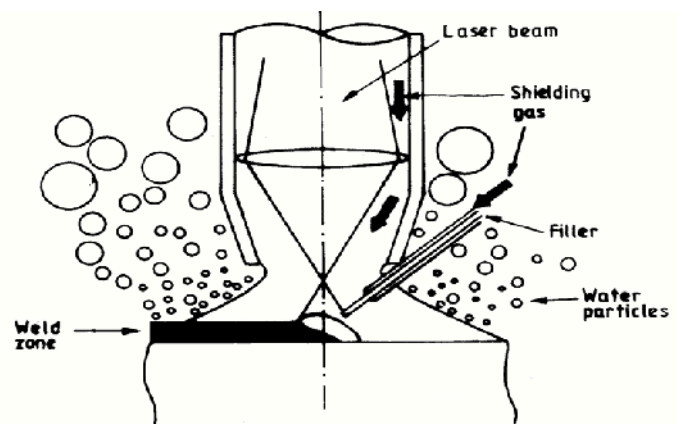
Schematic of laser welding with a filler rod.
